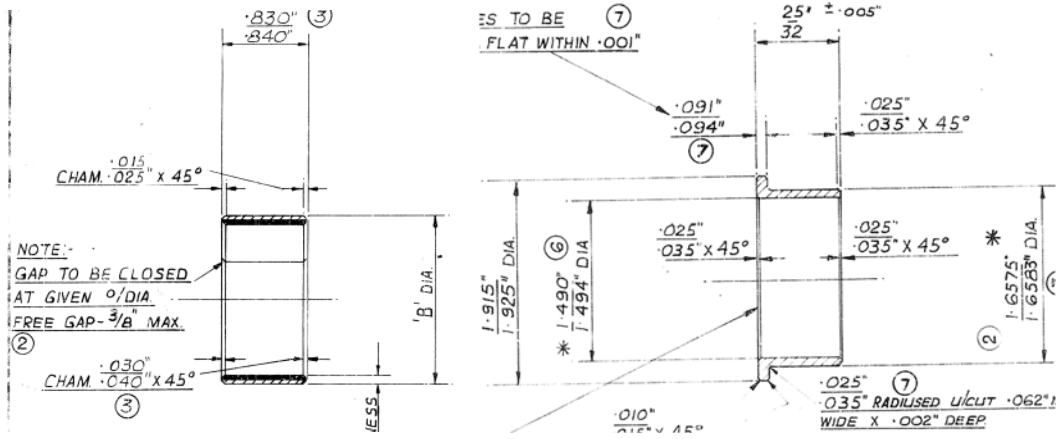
Primary gear bushes (inner) 22G401 and (outer) 22G109.
